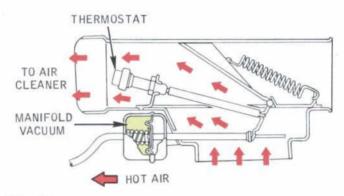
Duct and Valve Assembly in Heat-On Position — Warm - Up
